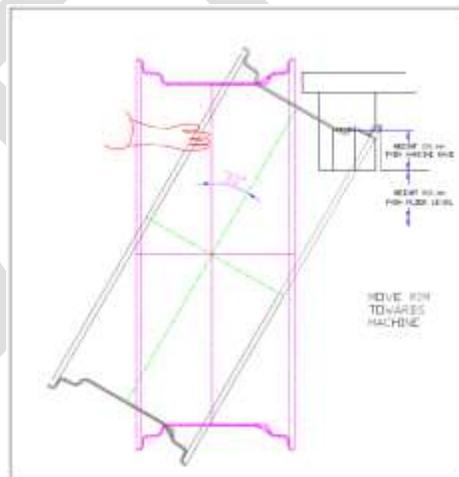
Valve Hole Depression Arrangement [Courtesy to RIM Plant]
